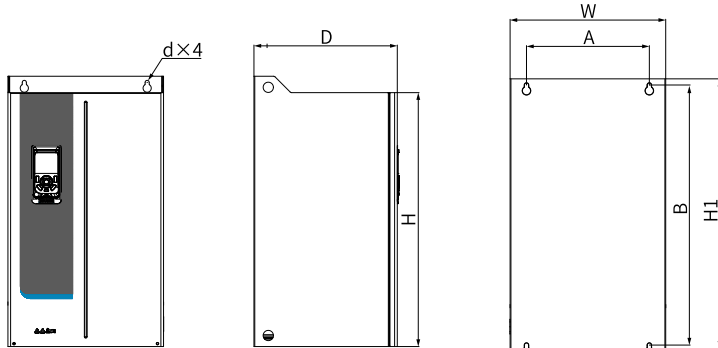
Outline dimensions and mounting dimensions of S8 to S9 models
